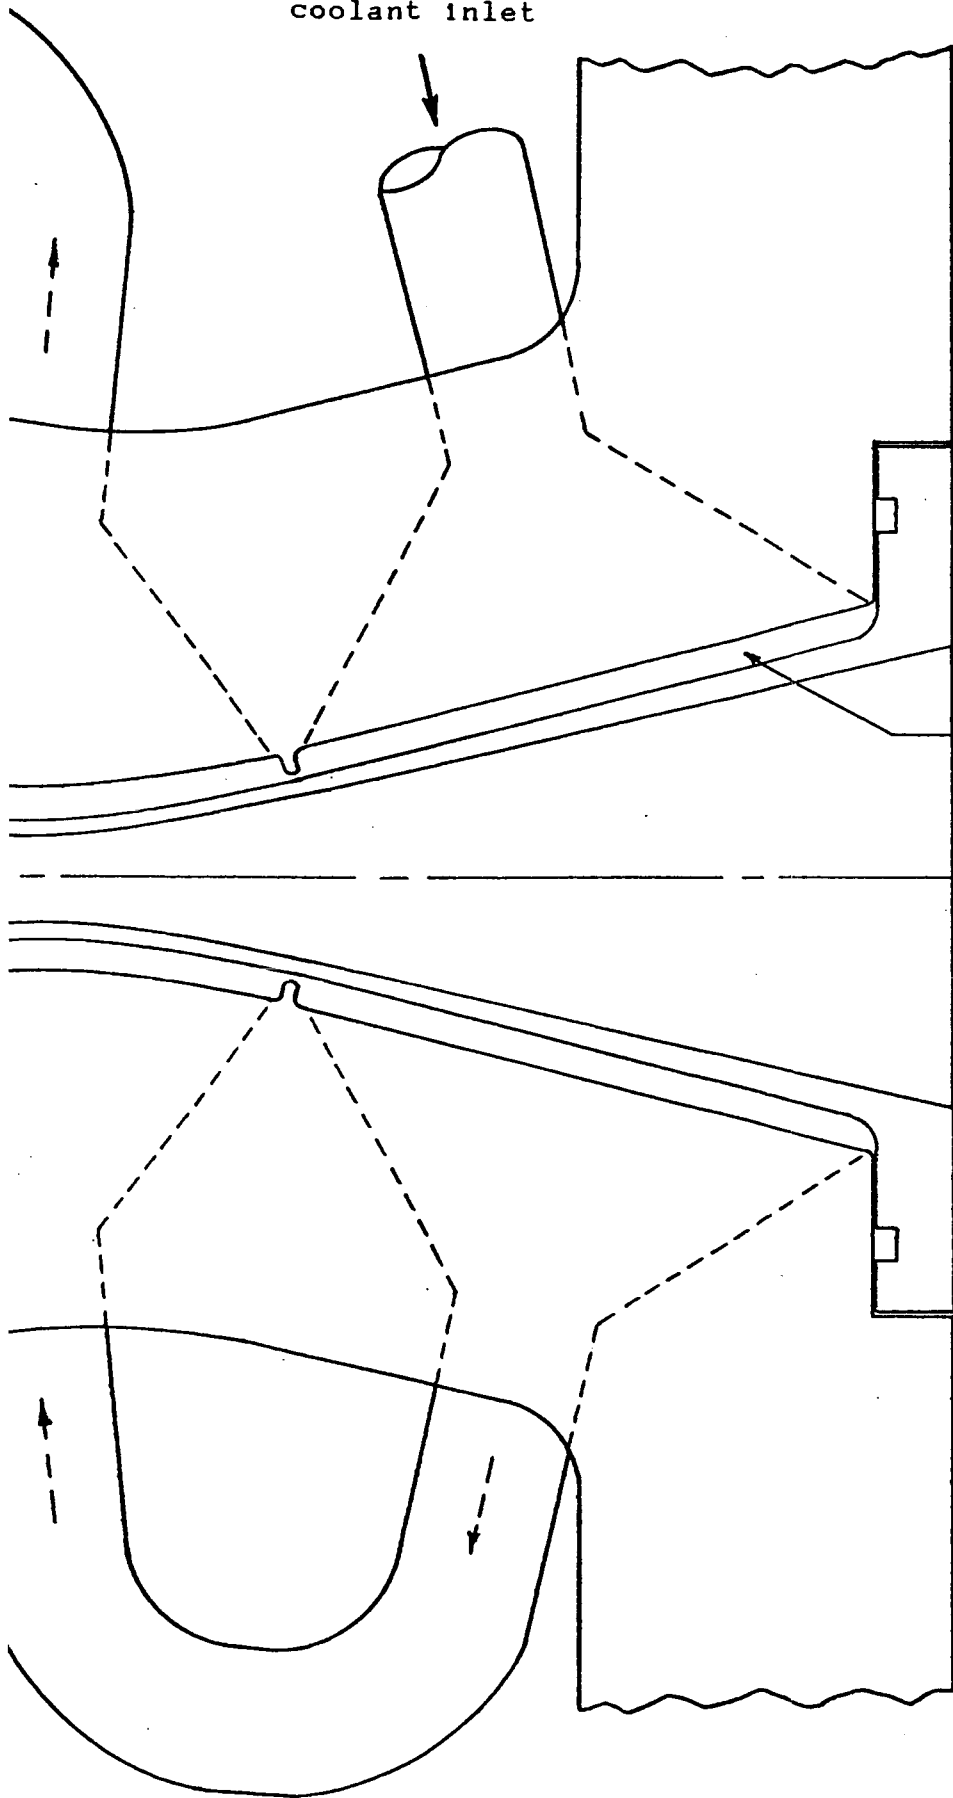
The proposed Mach 14 nozzle and coolant system design.
